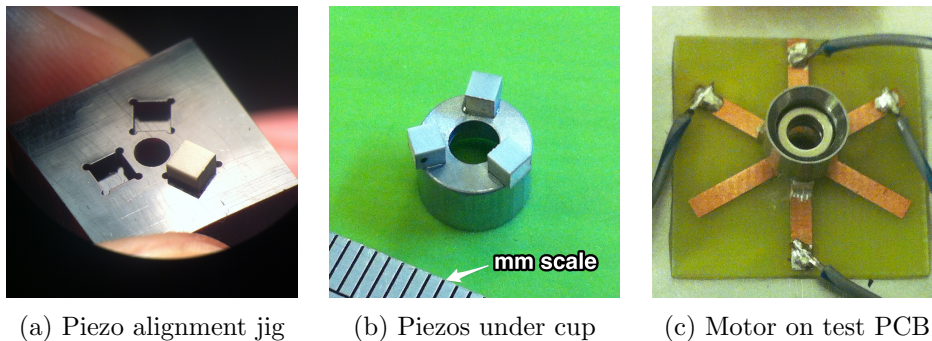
The first MLP motor prototype was assembled and mounted on a simple break-out PCB for the purpose of testing.
